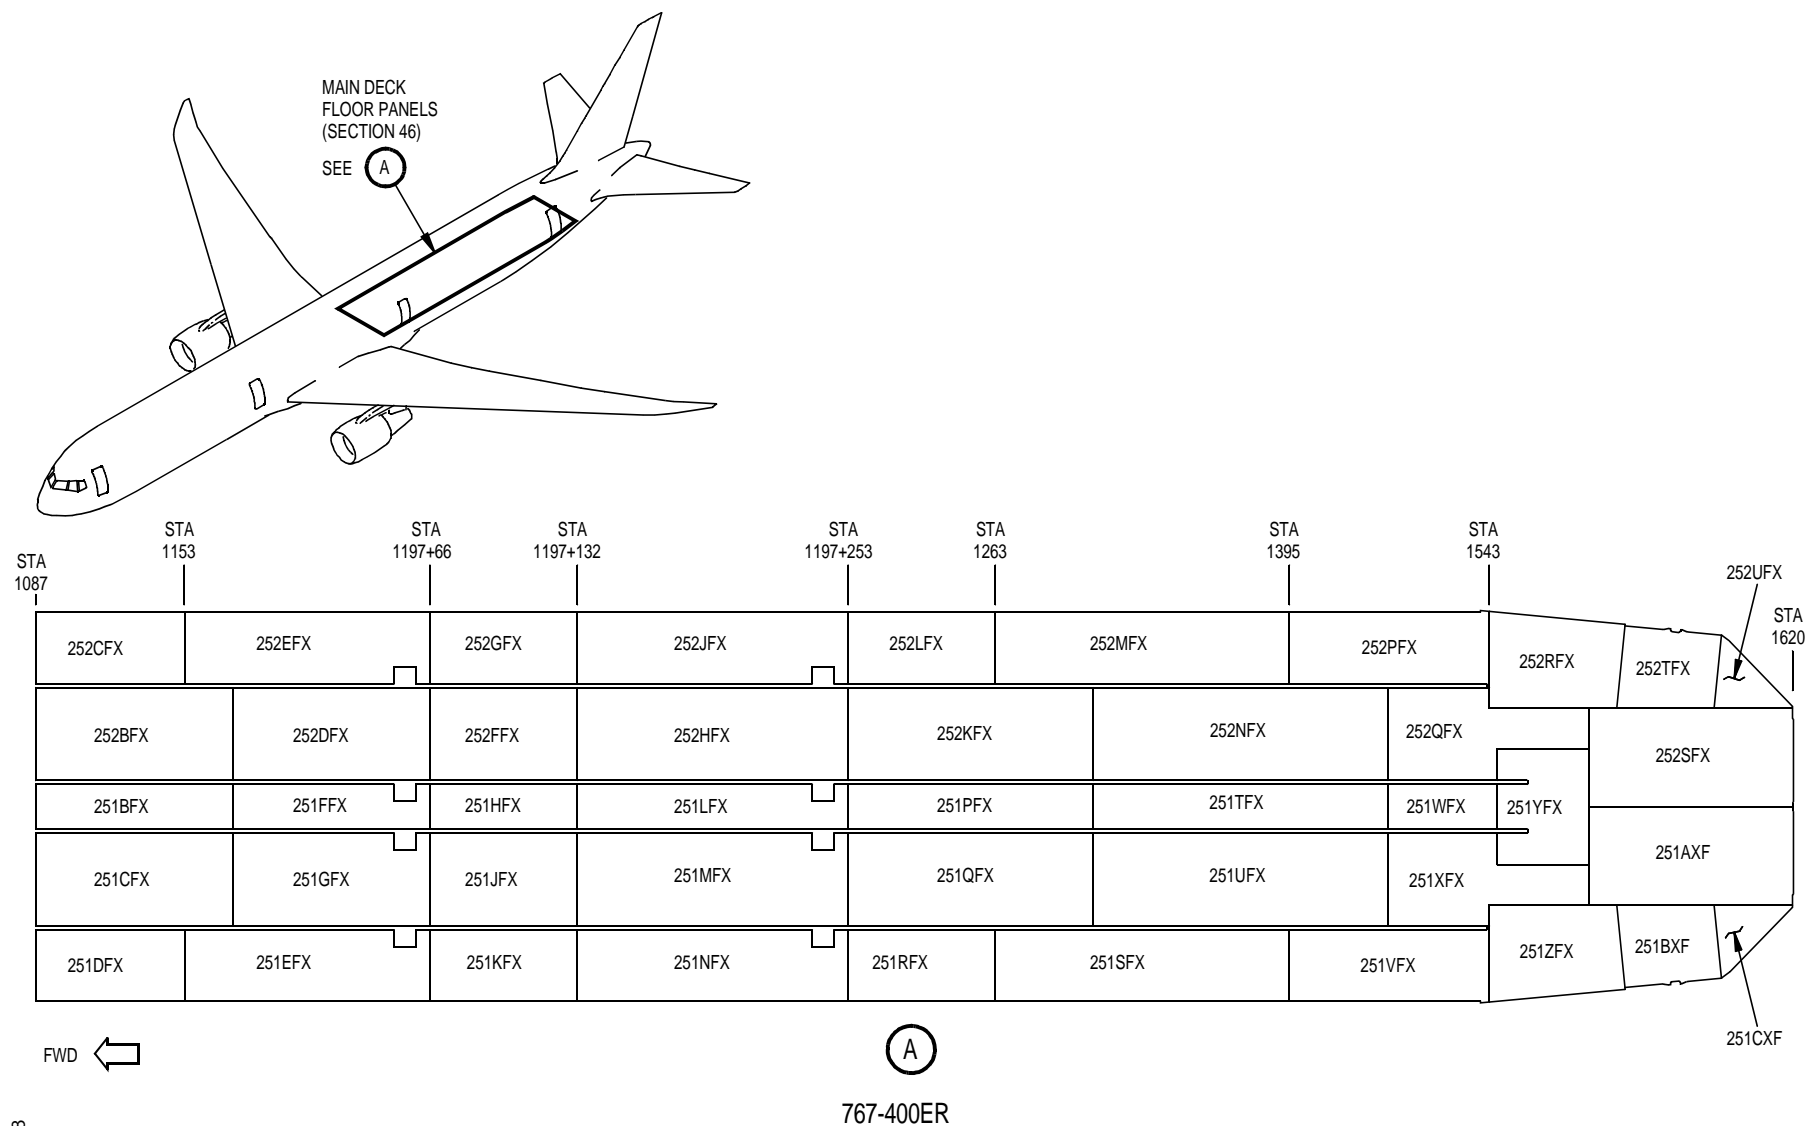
SUB-MAJOR ZONE 251/252 PASSENGER CABIN FLOOR PANELS BS 1087 TO BS 1620 (-400ER)
